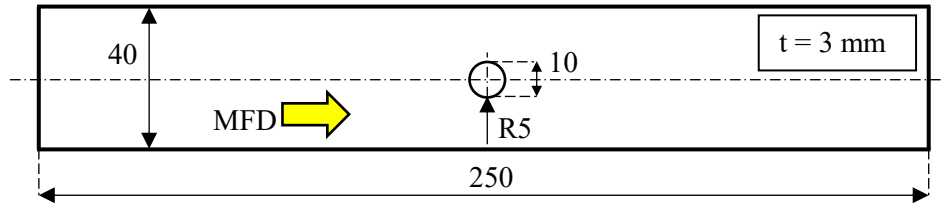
Geometry N/D. Specimen dimensions (DEM08).
